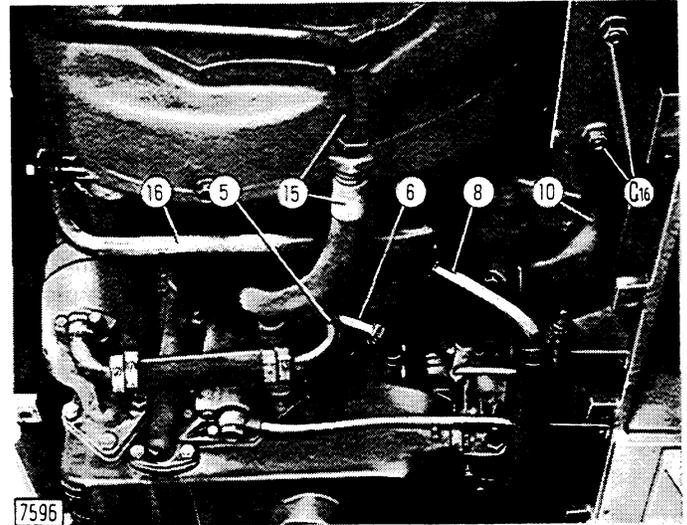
Bottom View of the Torque Converter/Gearbox Assembly
